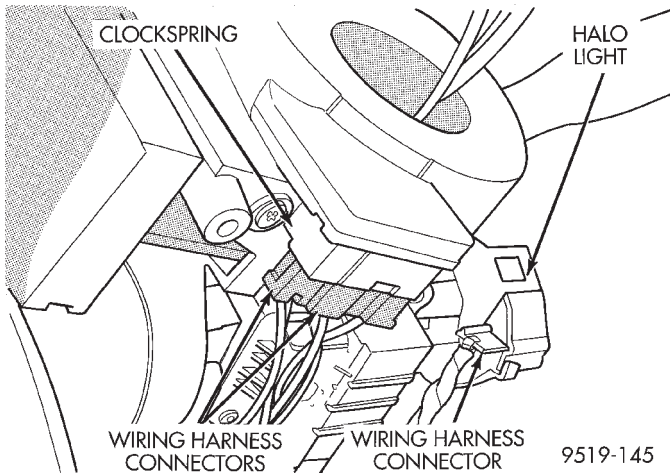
Wiring Harness Connection To Clock Spring And Halo Light
